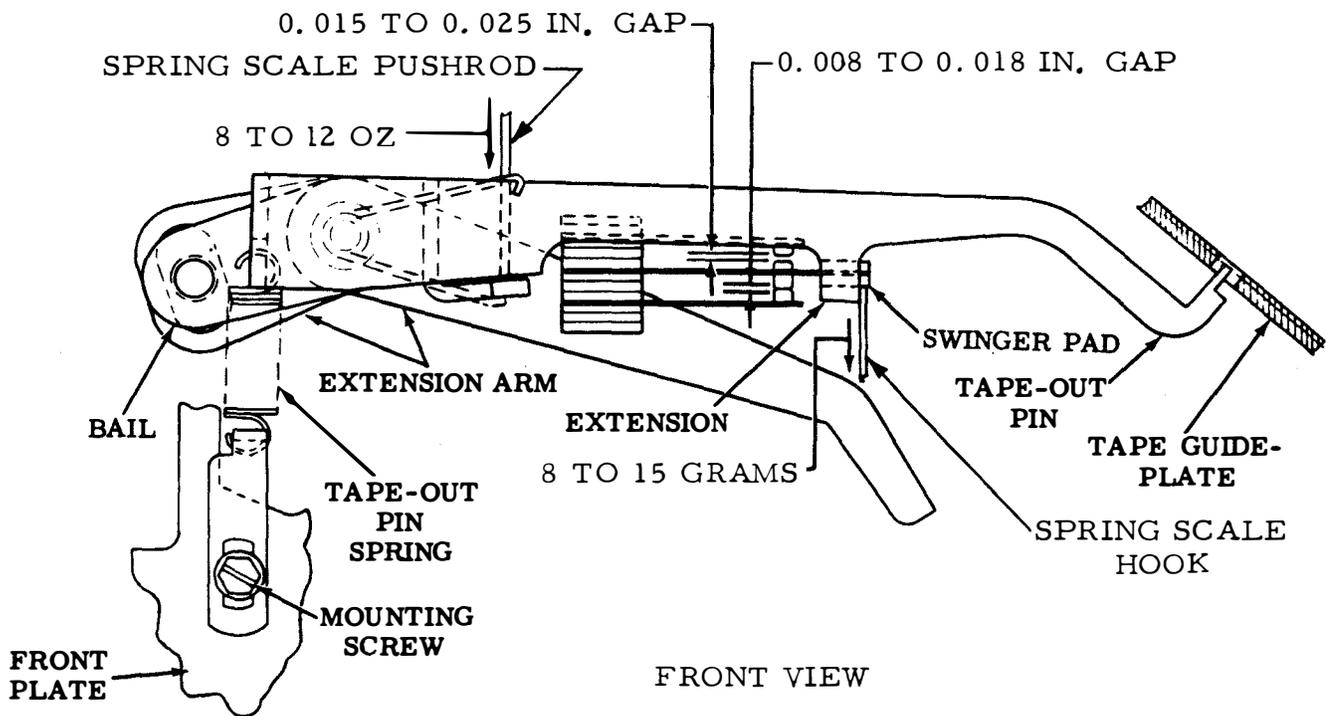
Tape-Out Contact and Tape-Out Bail Torsion Spring
